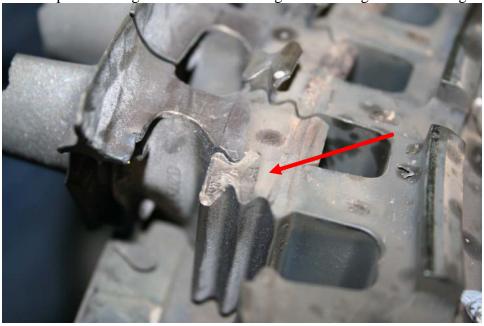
Close up of lug No. 1 with arrow pointing to the dark-colored, elliptical-shaped fracture surface feature (P&W)
